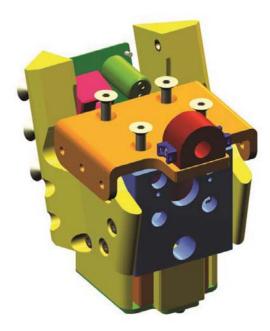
Removing the lower lumbar mounting bracket weldment
